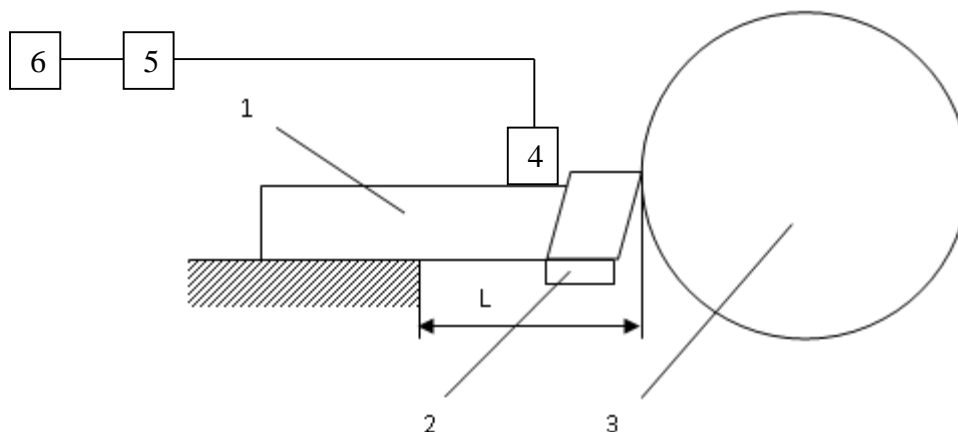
Frequency measuring scheme for turning tool. 1 – cutting tool; 2 – energy harvesting element; 3 – workpiece; 4 – accelerometer KD 91; 5 – oscilloscope; 6 – computer; L – length of free end of shank [34].
